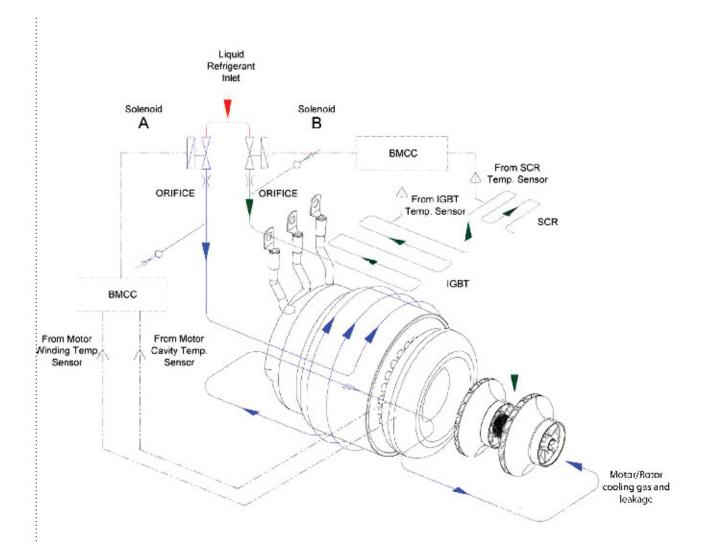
Compressor Motor and Power Electronics Cooling (TT300/TG230 Serial Cooling)
